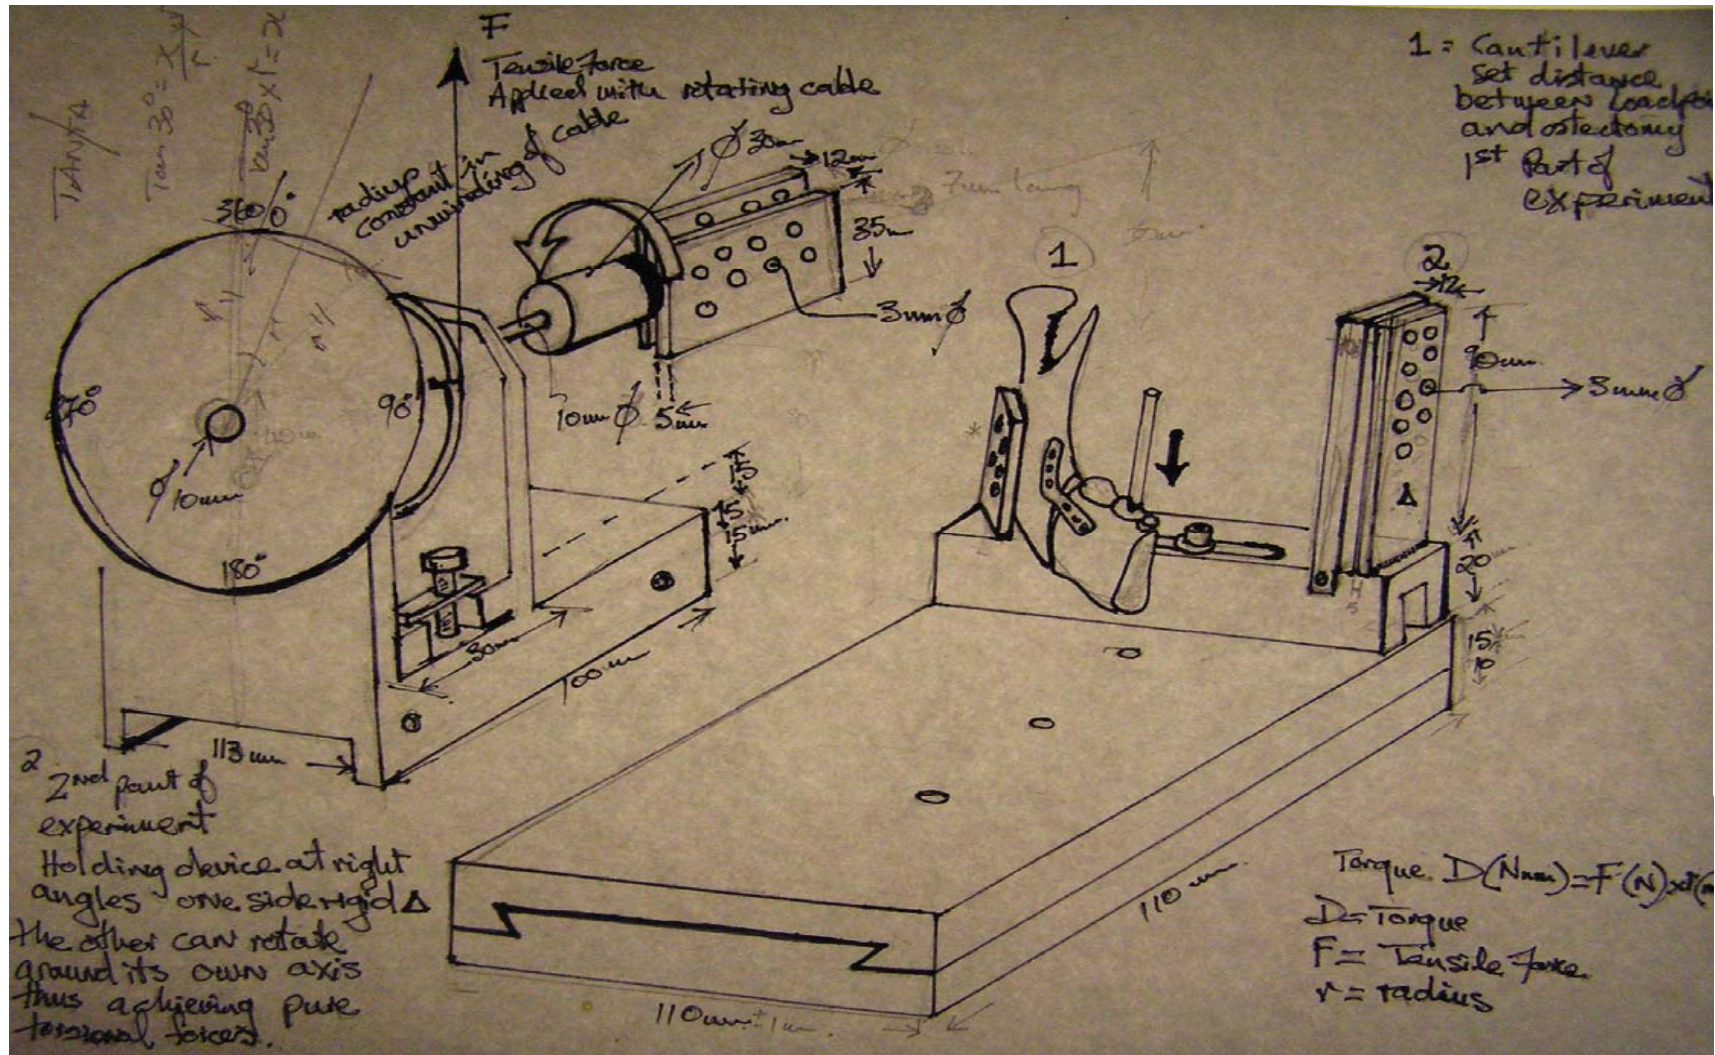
Design sketch of test model arrangement (own design and manufacture)
